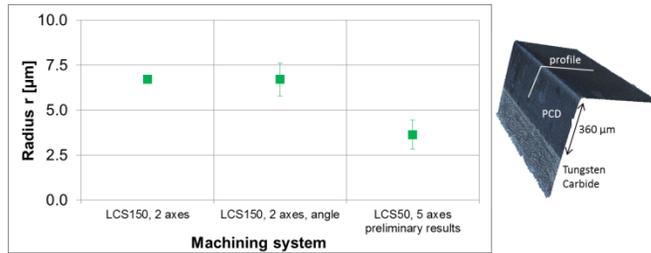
Cutting edge radius measurements PCD tools cut with the Laser MicroJet® technology depending on the cutting system and the number of axes employed
